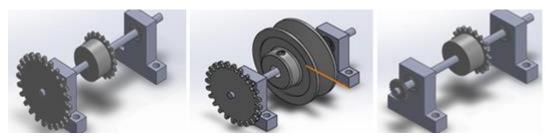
Preliminary component sub-assemblies of mechanical breadboard
